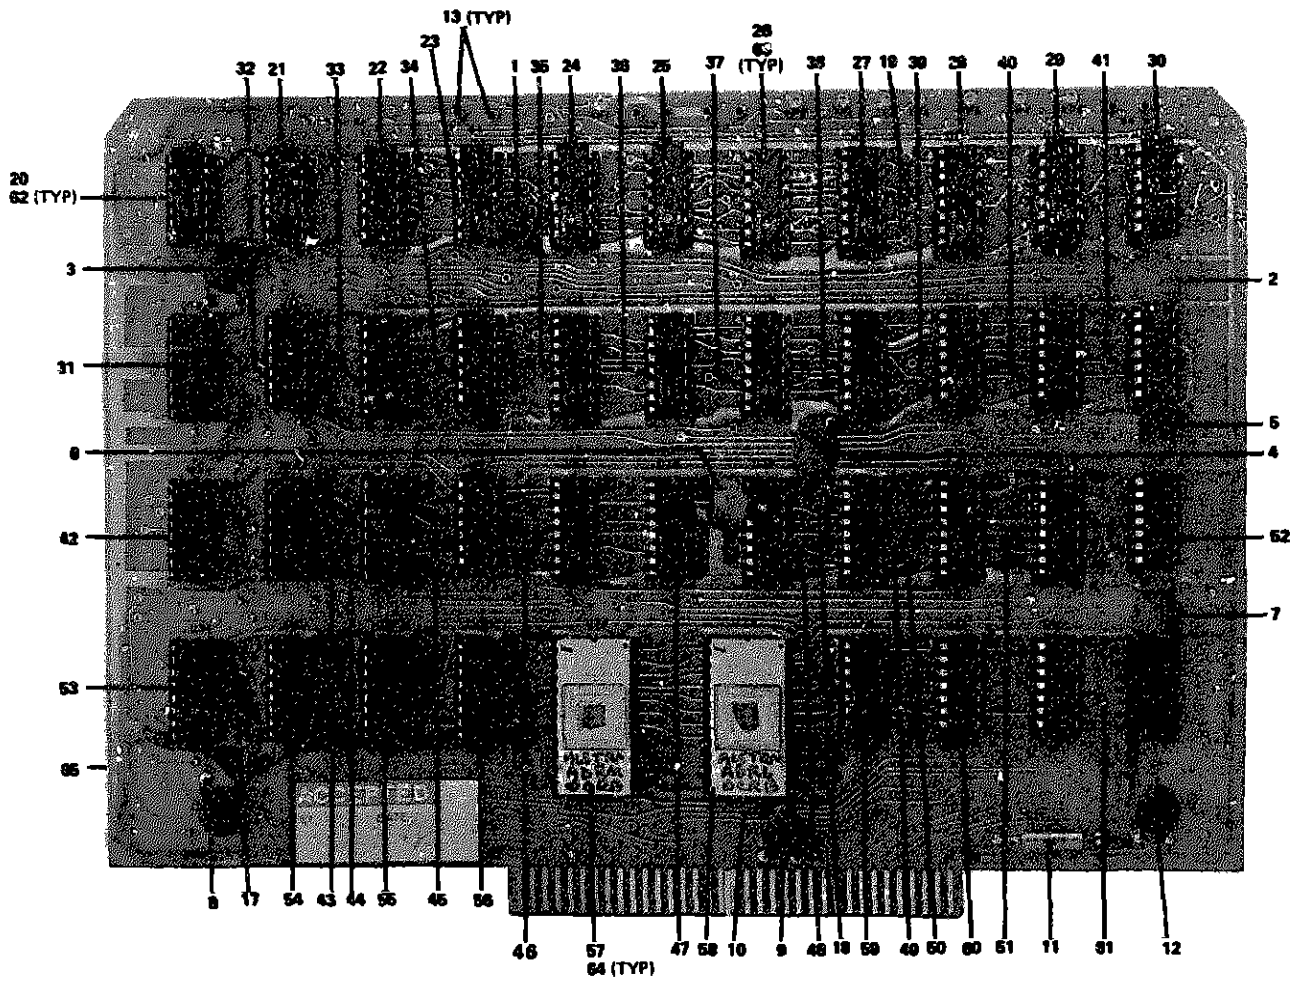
Tempest (SRECO) Circuit Card Assembly 1A13
